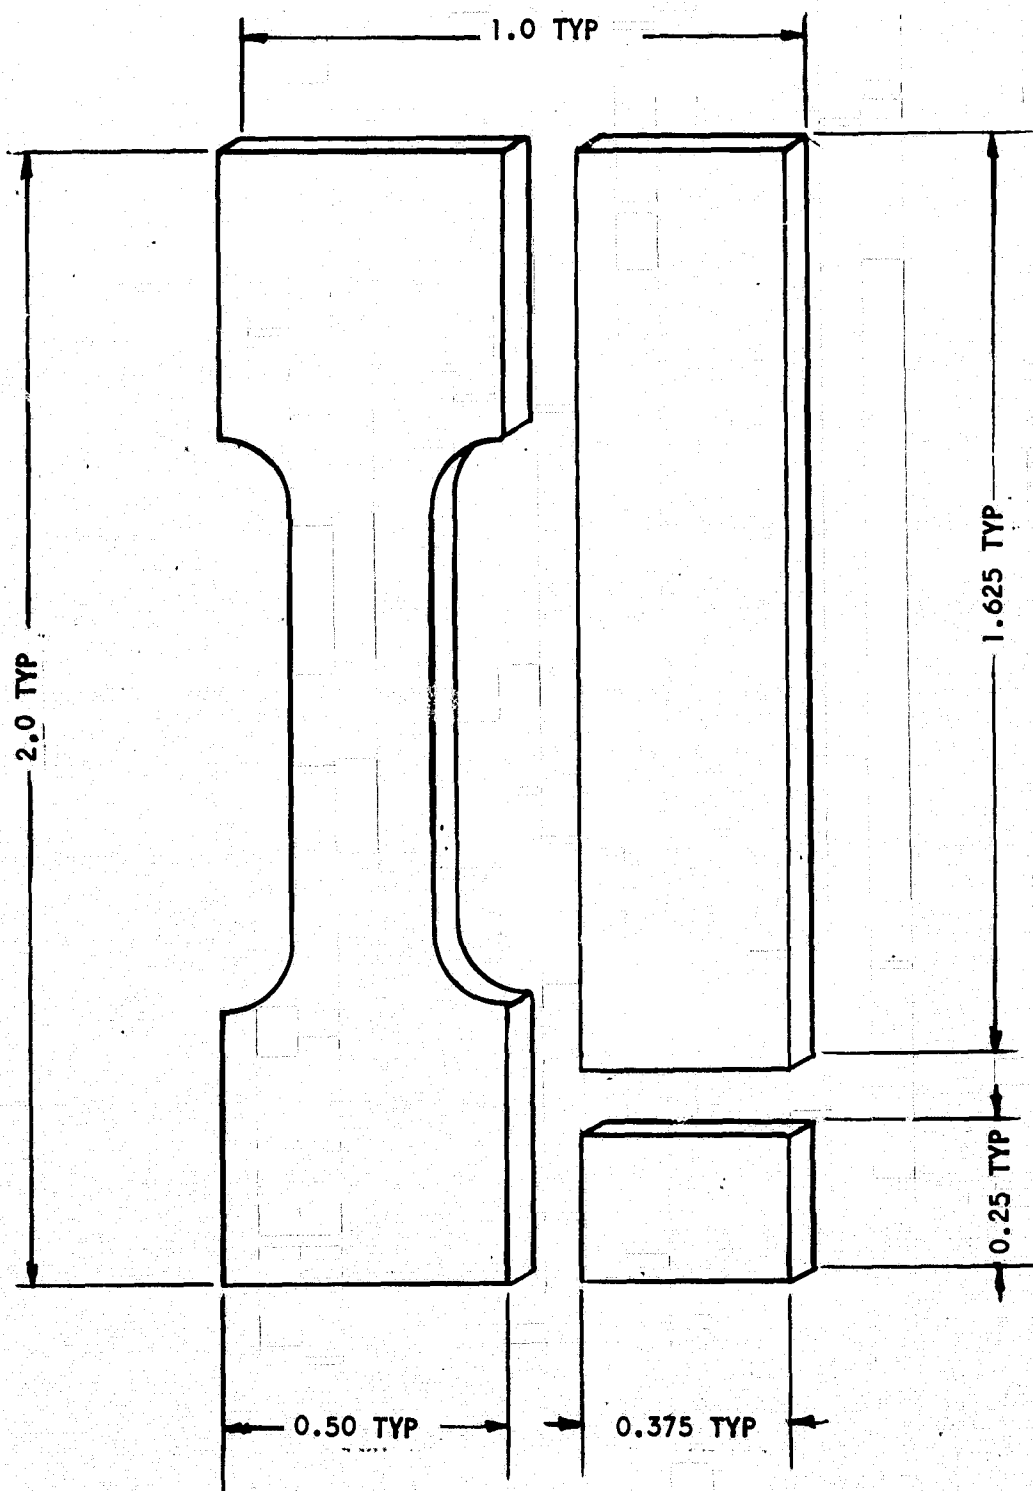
Specimen Sectioned After Exposure Showing Relative Locations of Test Pieces.
